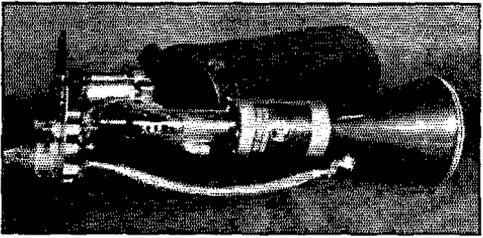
The 1801 unit open to show the parts in the assembly.
